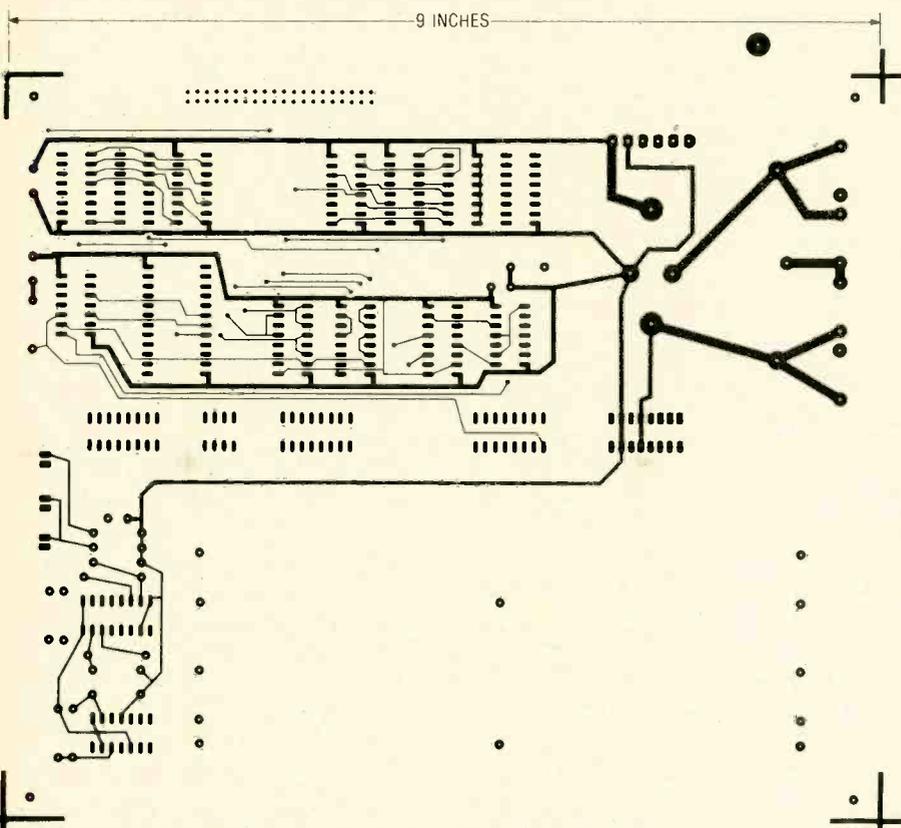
FOIL PATTERN for the under side of the printed-circuit board.
